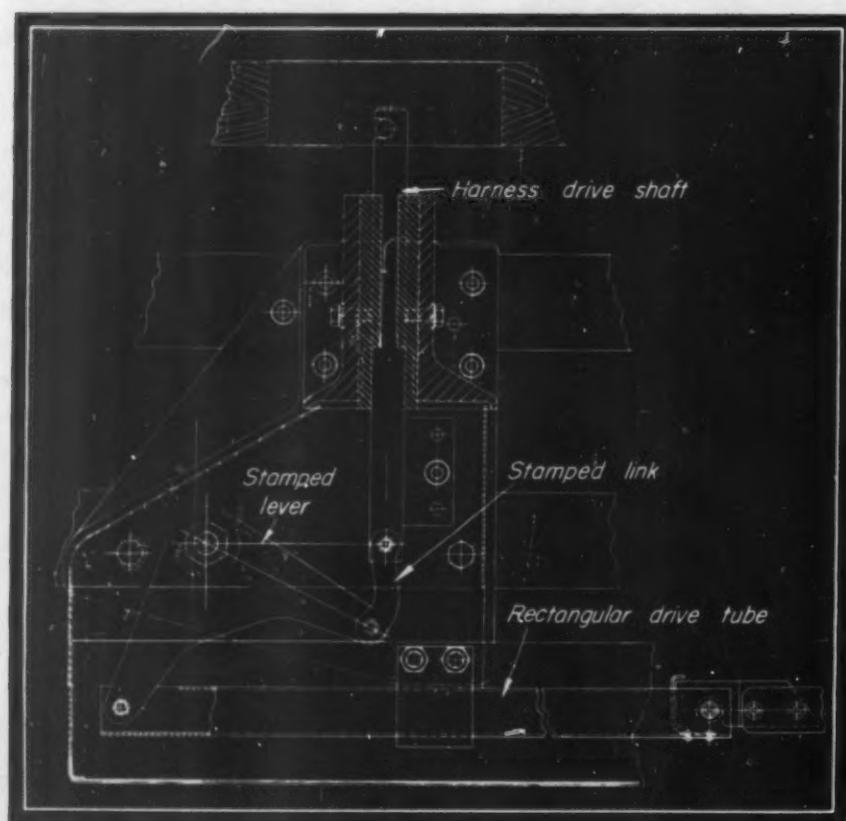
Stamped lever and link replace the gear and rack drive shown in Fig. 2 for original machine
